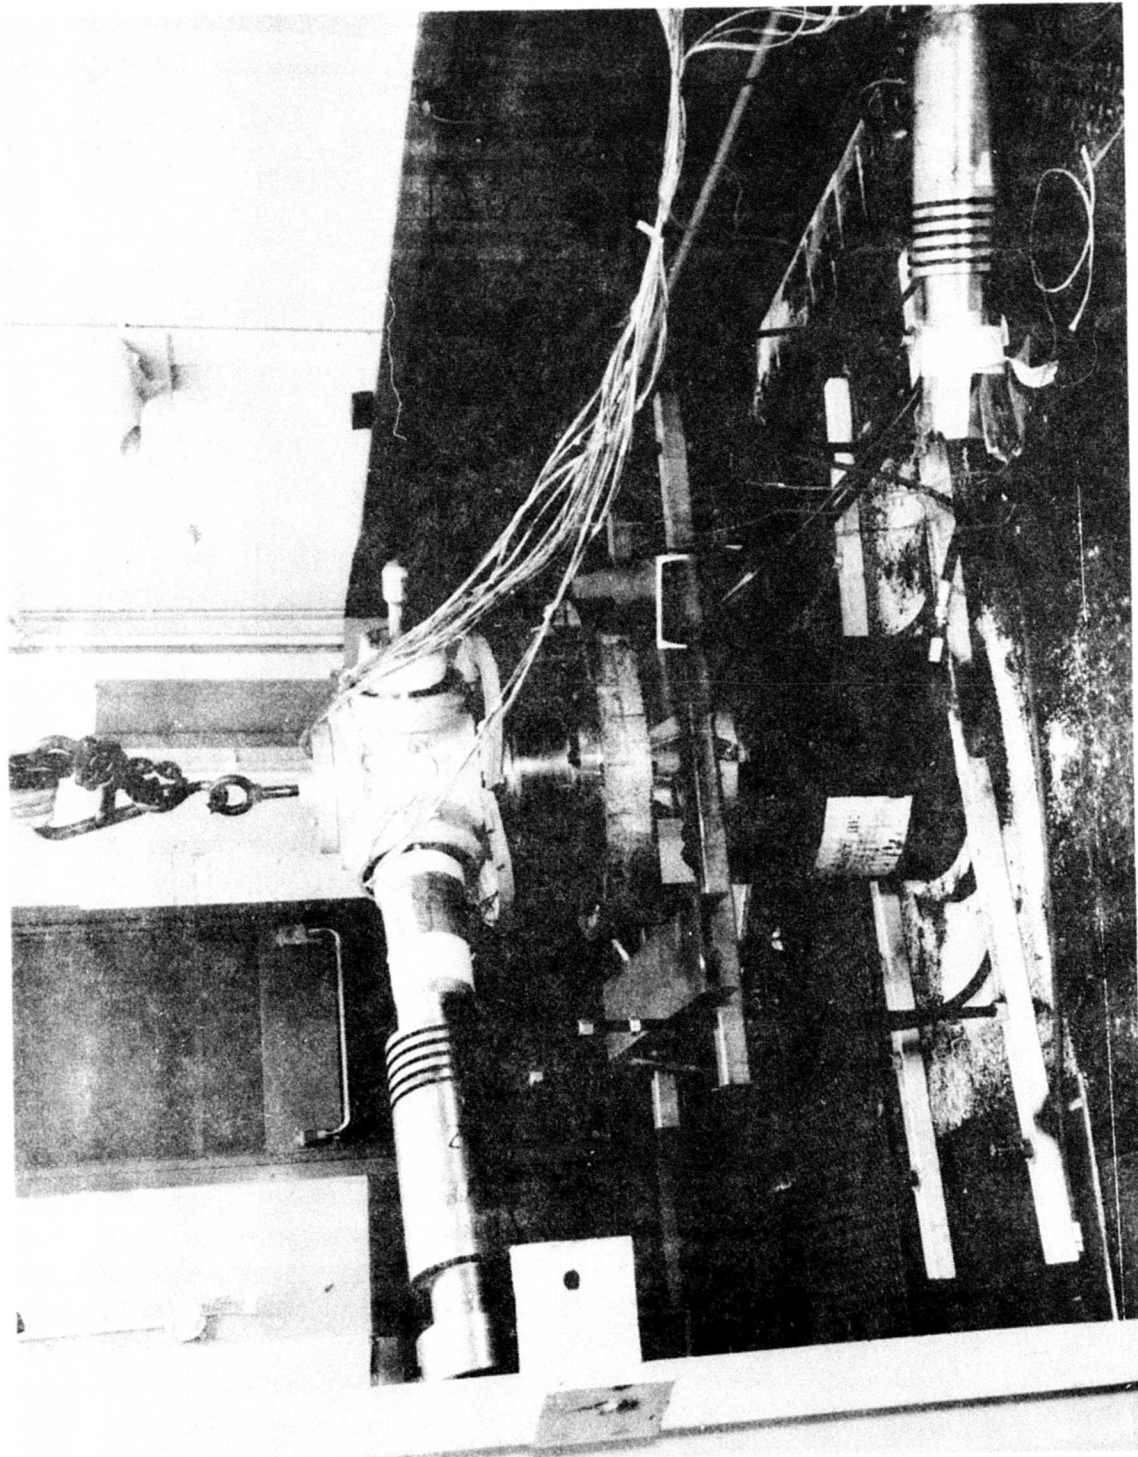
SPAR NUMBER 5 AFTER FRACTURE, 3P OUT-OF-PLANE FATIGUE TEST
